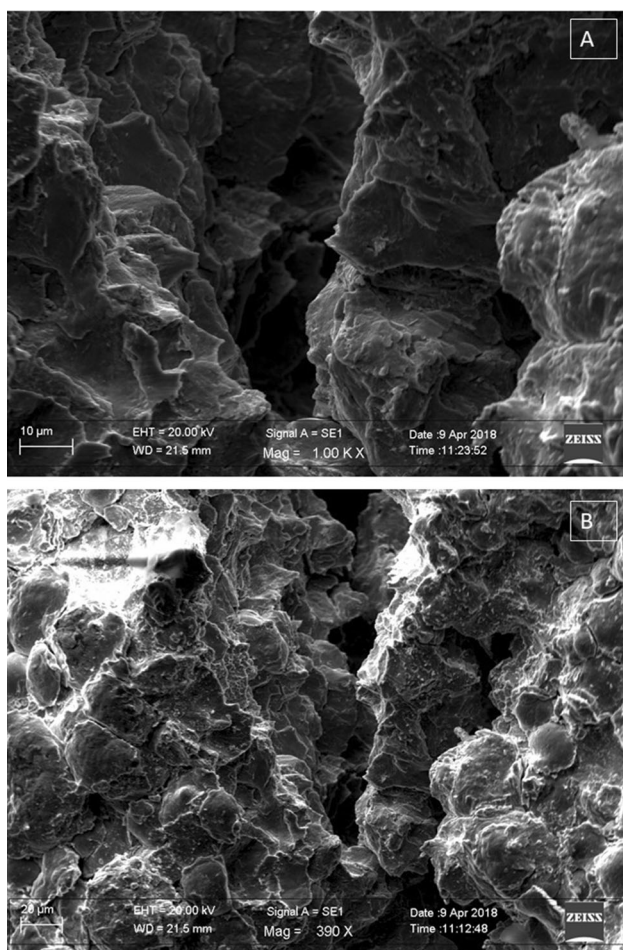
Fracture surface of the 60° notched specimen sprayed at 1000 °C and 50 bar
